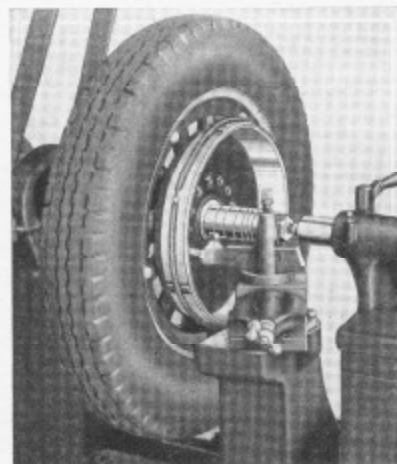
Truing an Internal Brake Drum Mounted on a Straight Mandrel with Universal Bearing Adapters
